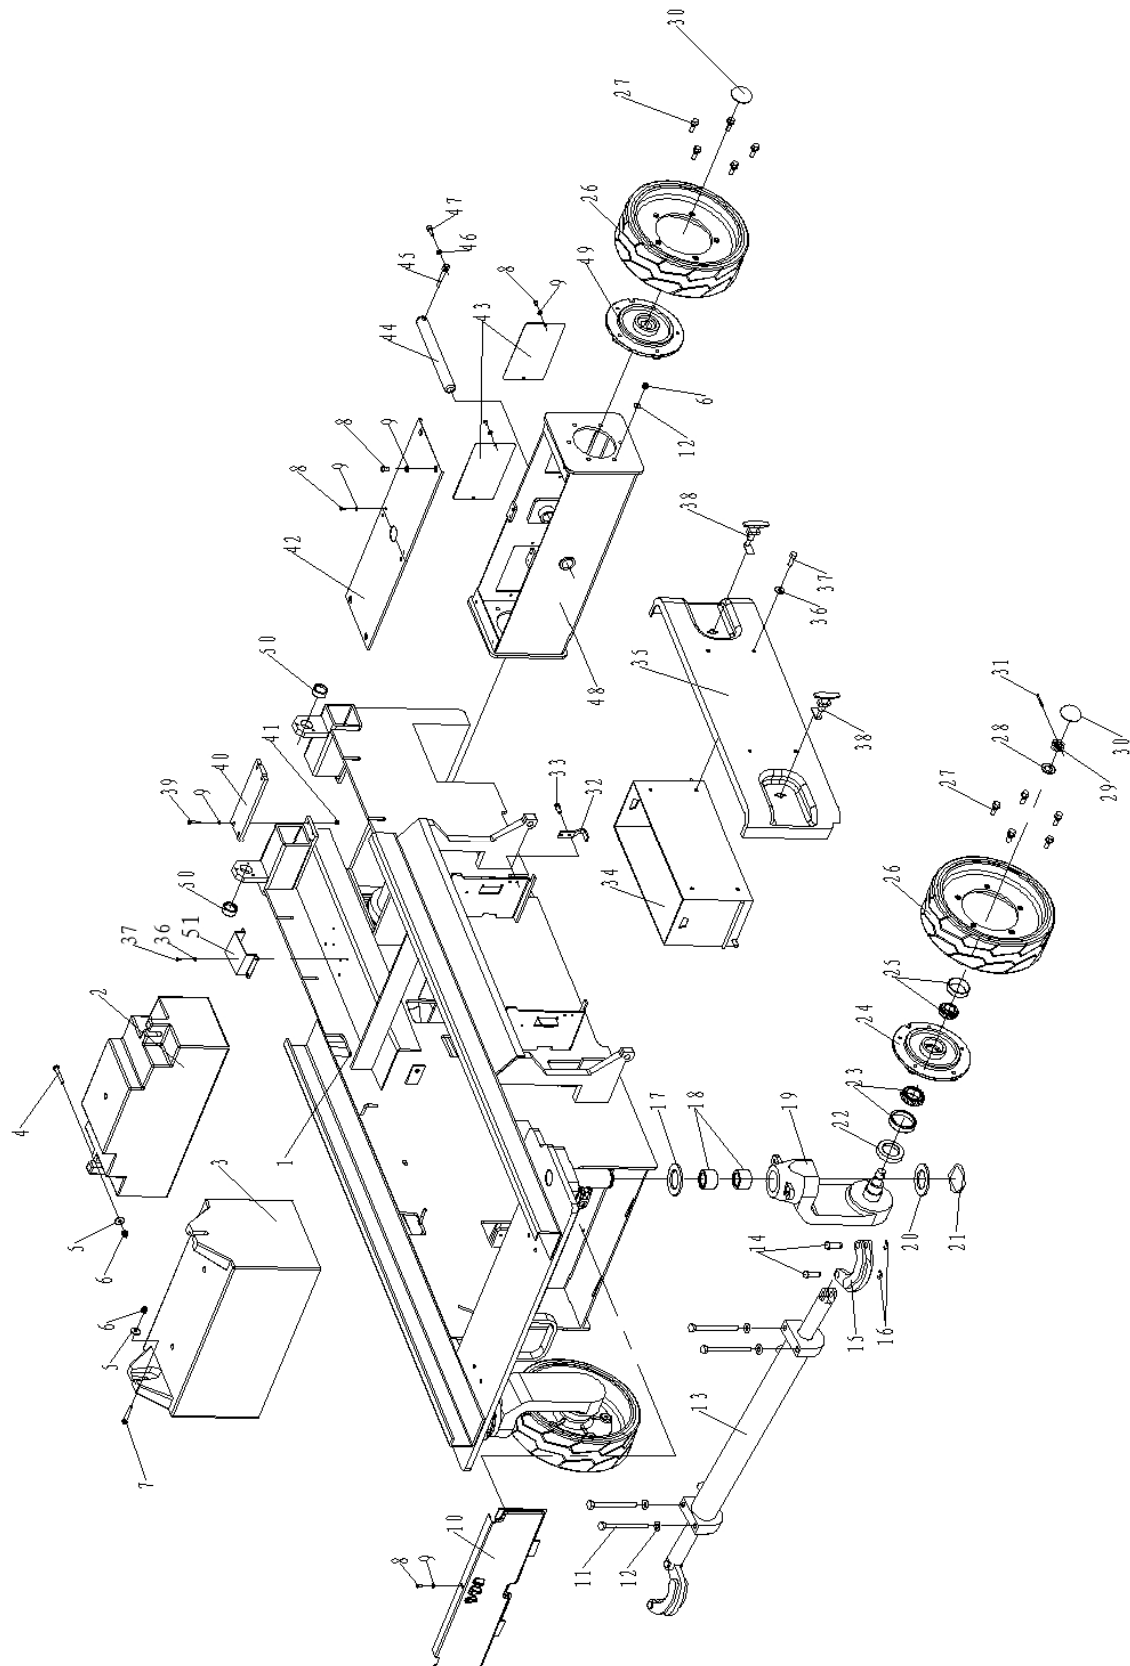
Parts and components of chassis (AWPS4679、AWPS4696)
